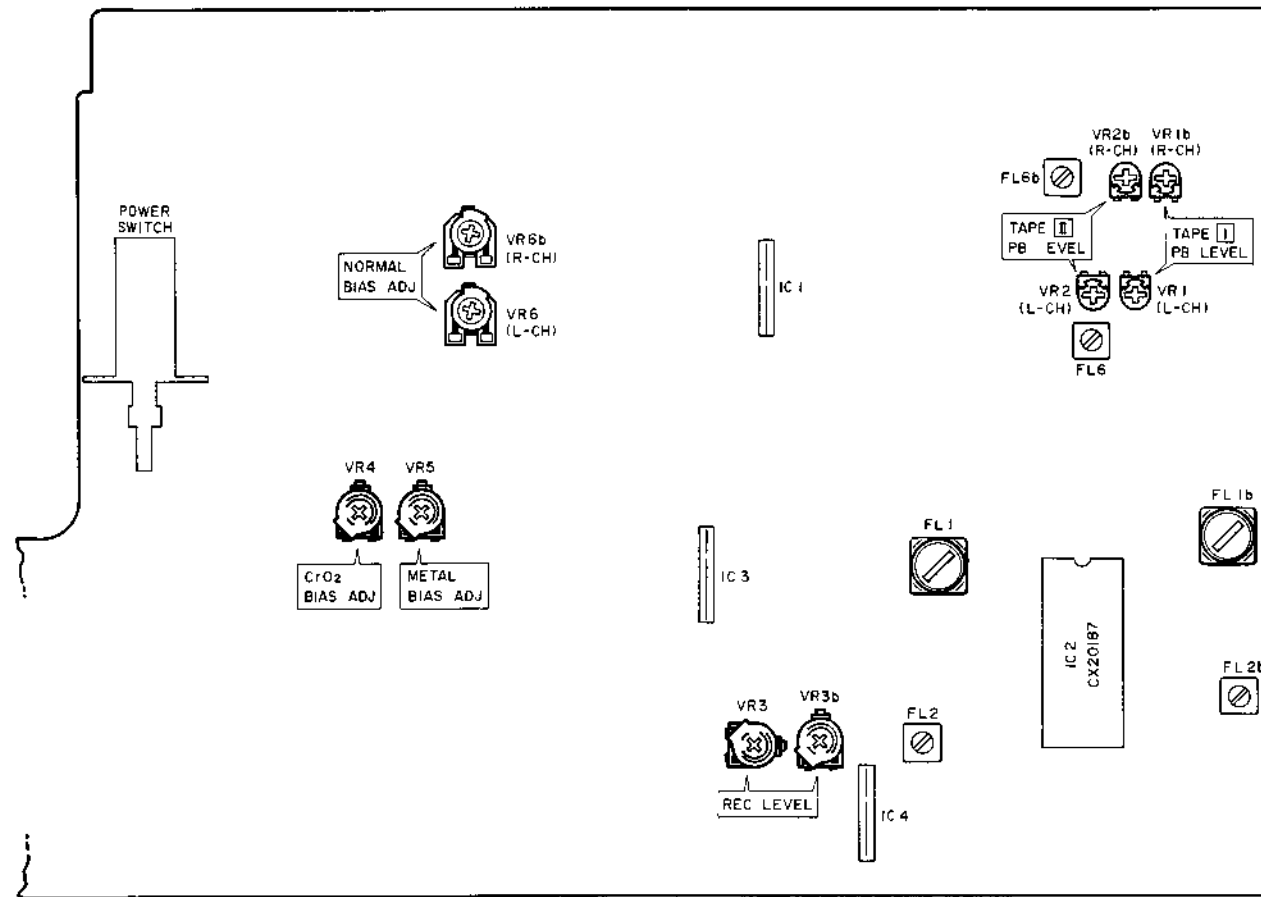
PRE AMP PCB ADJUSTMENT POINTS
